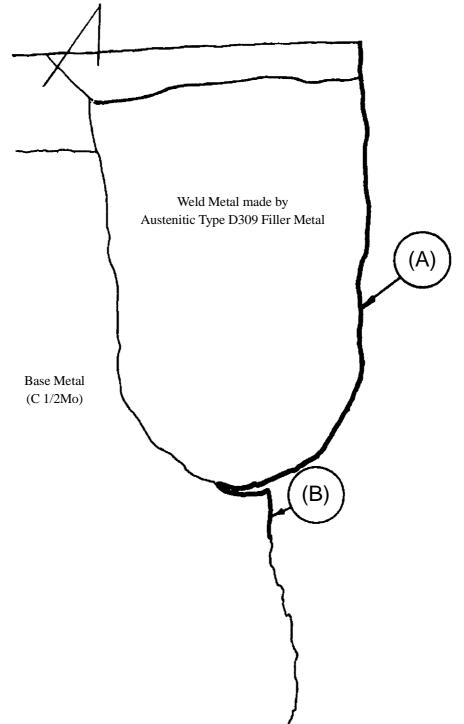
Schematic Representation of Fractured part weld repaired at shop.
